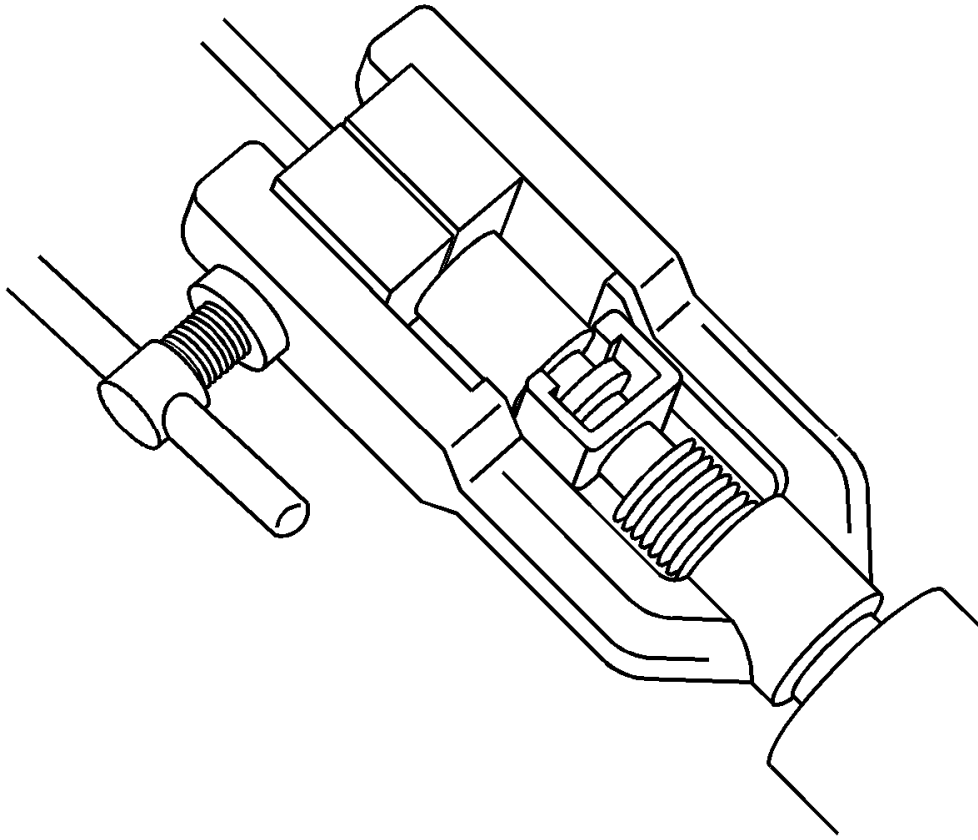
Bottoming Forming Mandrel Against Clamping Dies Using Pipe Flaring Tool
